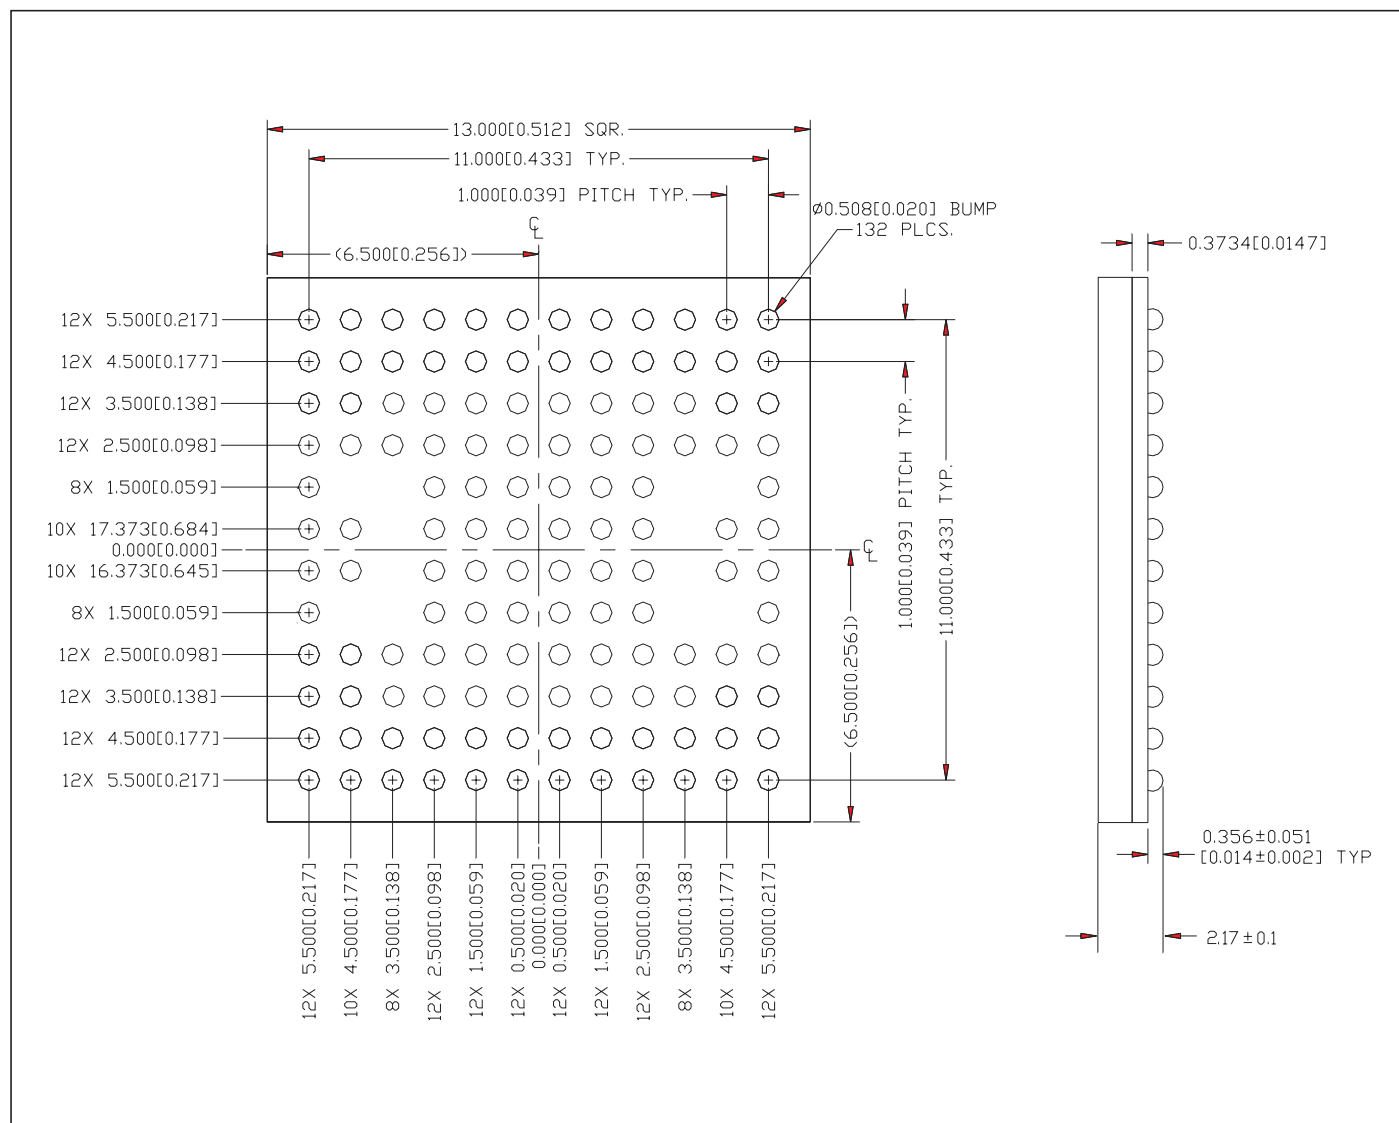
Package 132 pin ceramic BGA. All dimensions are in mm.
